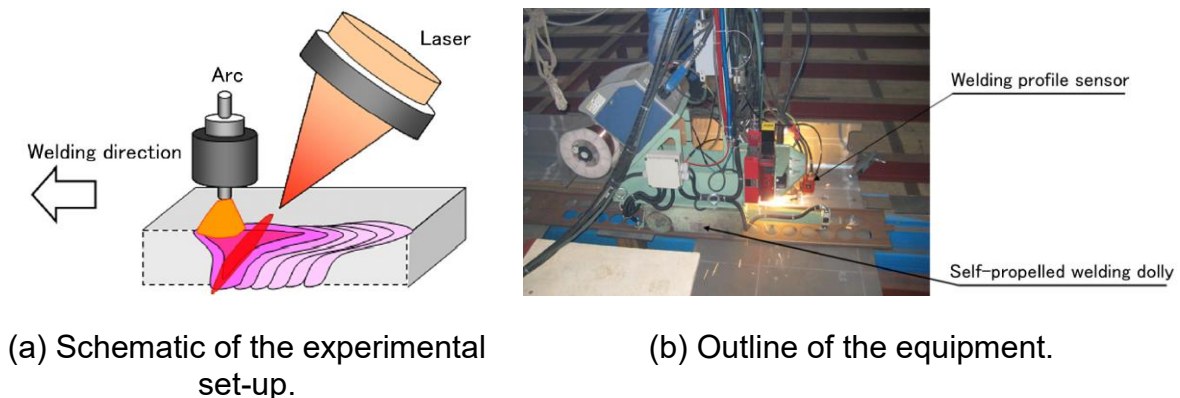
Illustration of hybrid laser-arc welding [87].
